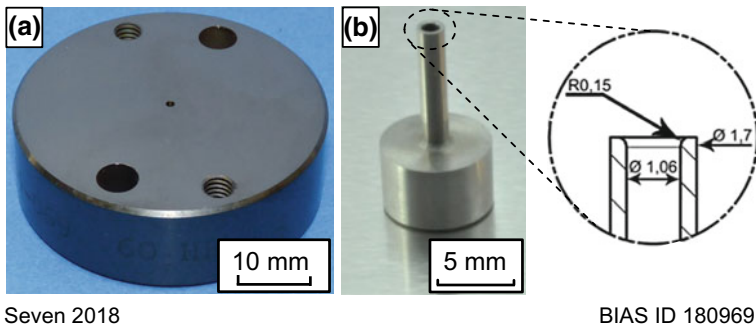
Micro deep drawing die (a) and combined blanking and deep drawing die (b)
